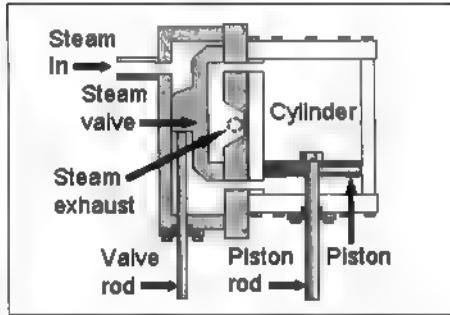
The layout of a classic sliding steam valve, showing where the steam valve contacts its housing.
